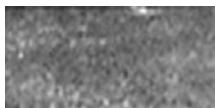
Photo of surface of shear of the sample cut by wire erosion
